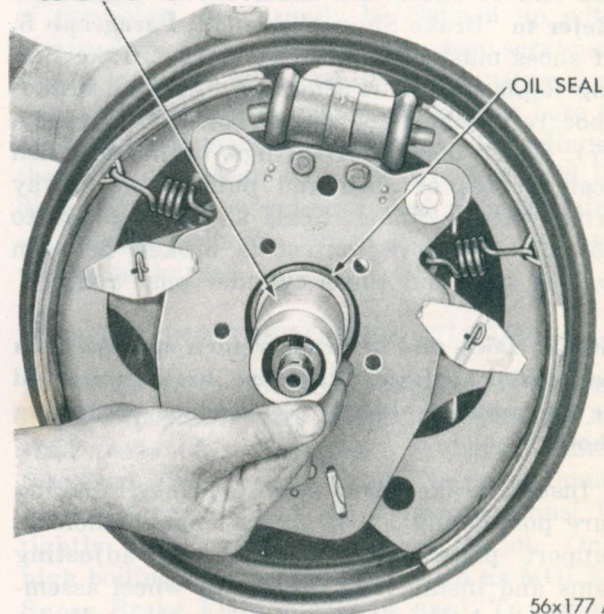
Removing or Installing Rear Brake Shoe from Support Plate
